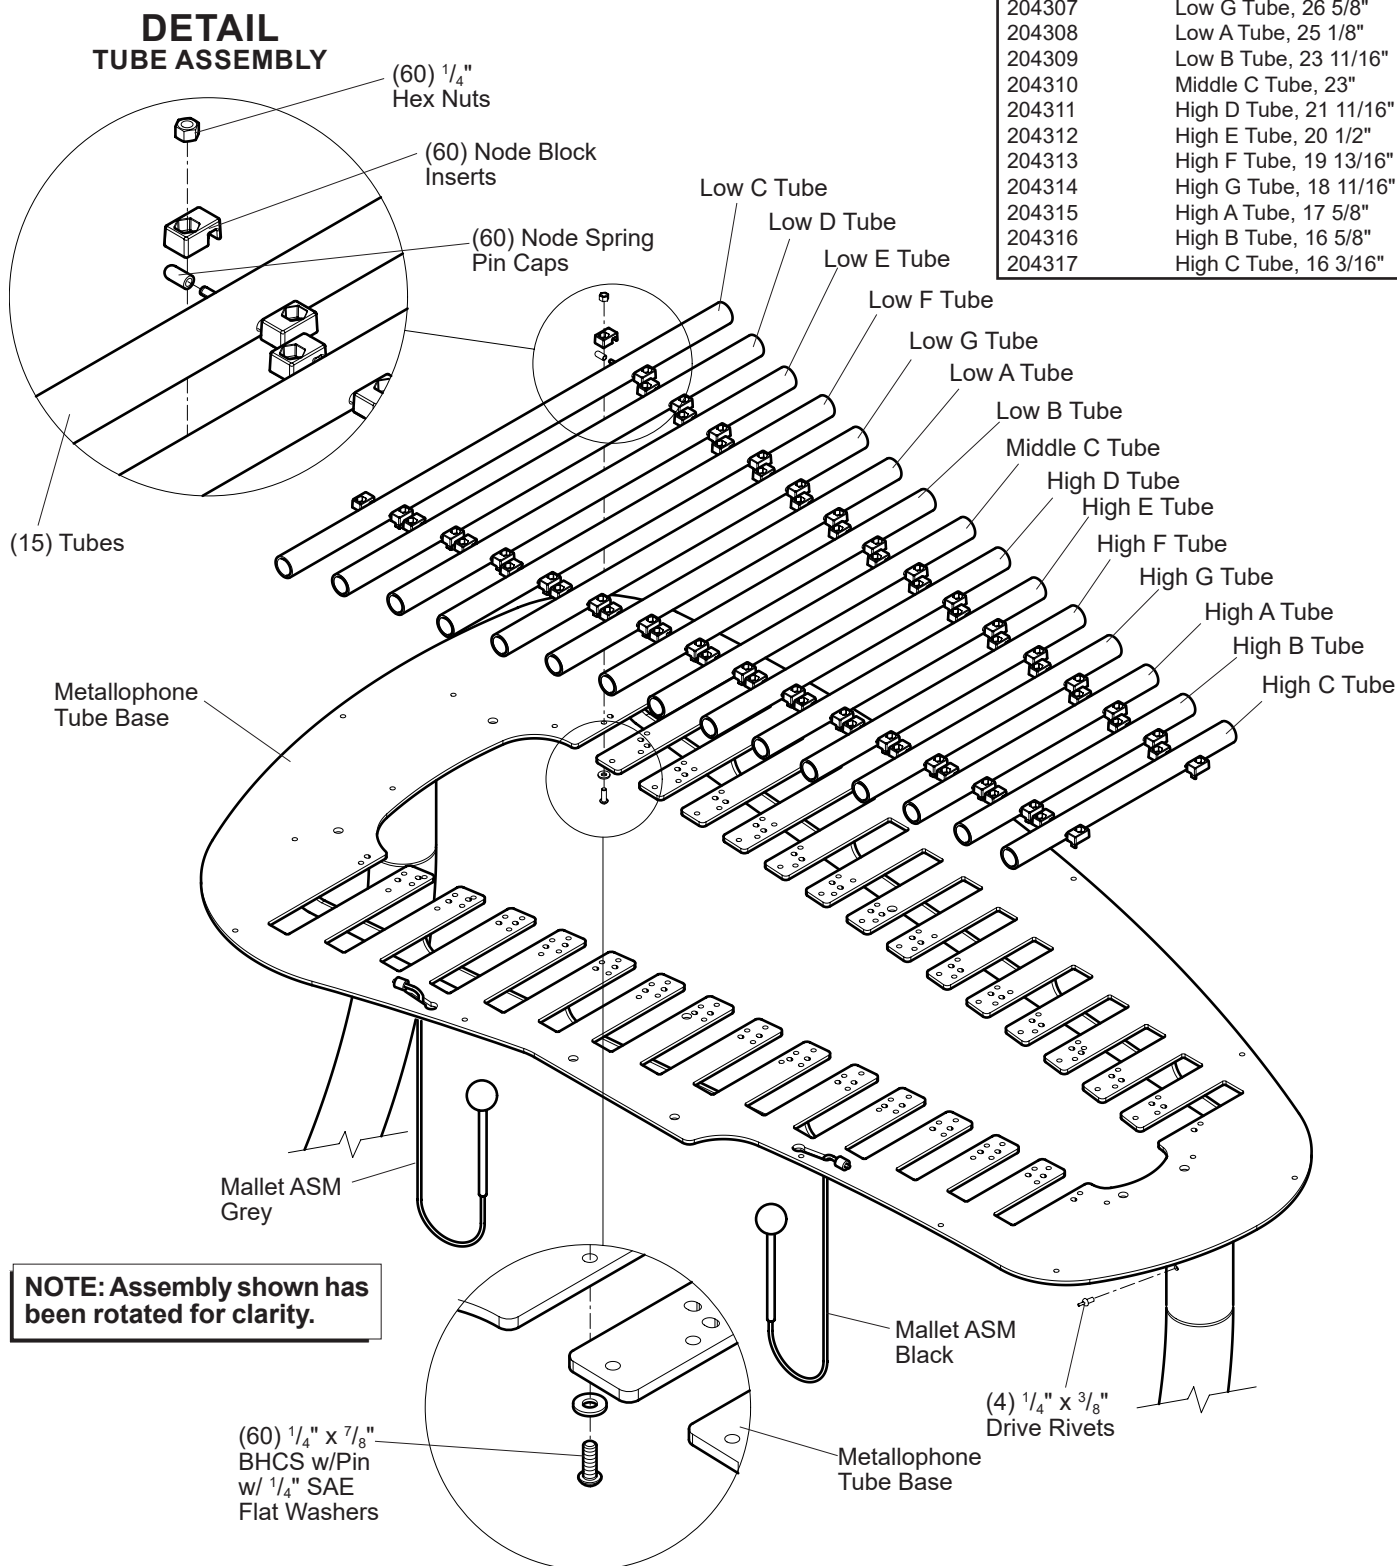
## DETAIL PRE-ASSEMBLE TUBE MOUNTS
